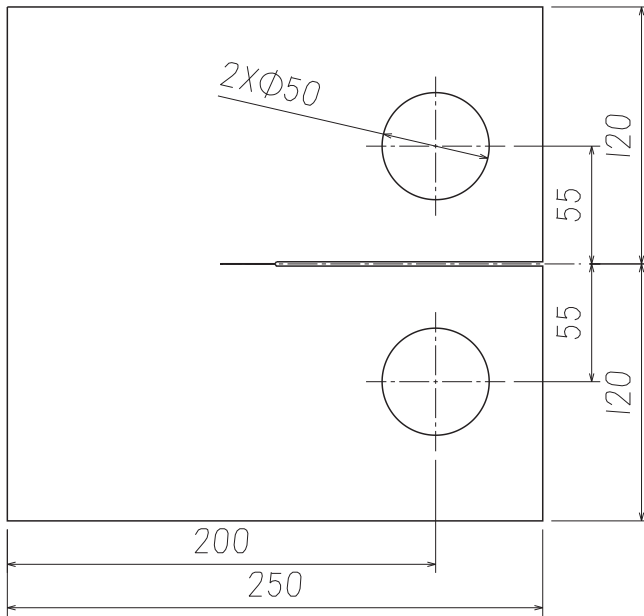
Detailed geometrical dimensions of the C(T) specimen.
